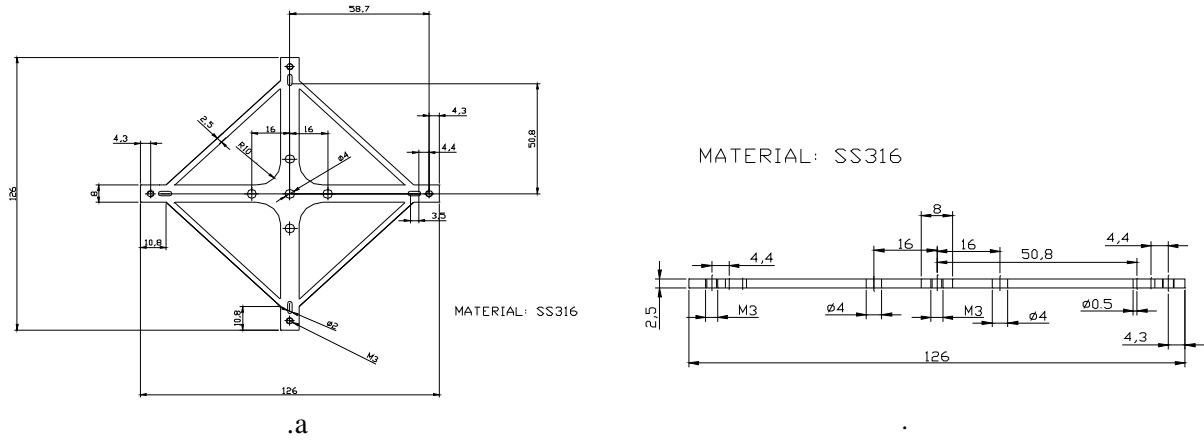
Wafer support drawings; .a: top view, .b: side view
